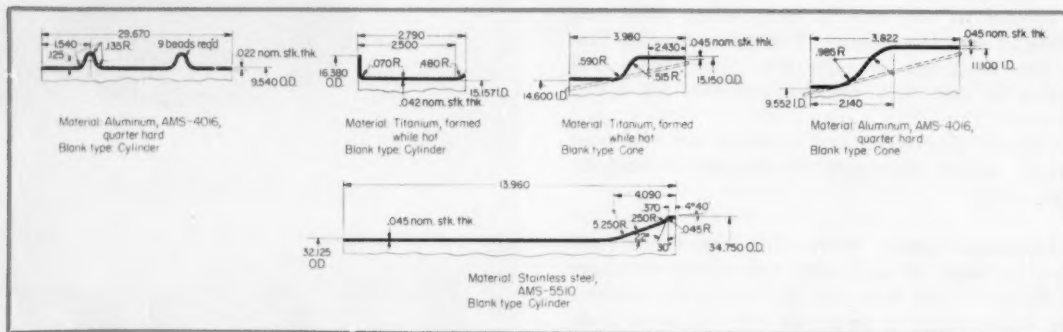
Typical dimensions and materials of parts formed and sized, or just sized, in one expanding operation. Blanks for these parts were coiled and welded; outlines
